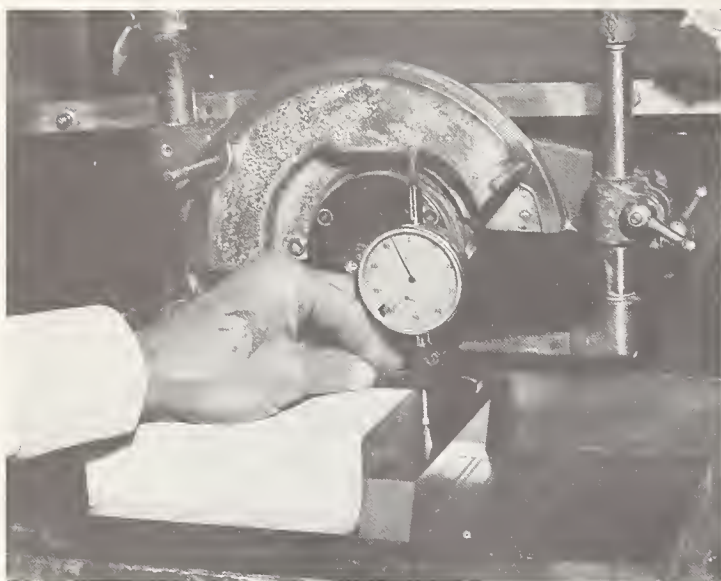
Measurement of specimen block for amount of material removed.
